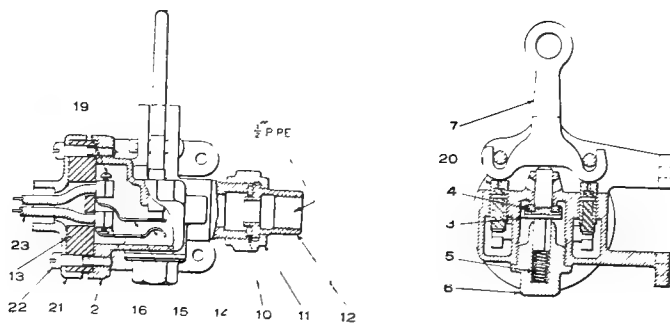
Electro-Pneumatic Car Discharge Valve.
